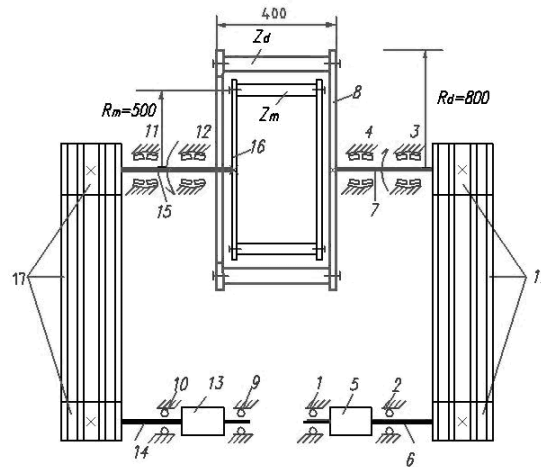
Grinding mill machine: 1,2,9,10 – electric motors bearings; 3,4,11,12 – driven shafts rotors bearings; 5,13 – electric motors; 6,14 – driving shafts; 7,15 – driven shafts; 8,16 – large and small impellers (z_d, z_m - number of large and small impeller rollers and R_d, R_m - radiuses of impellers, respectively), 17 – belt drives
